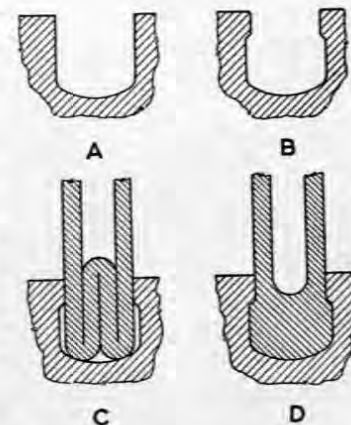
Connecting W-shaped sheet metal fins to a steel cylinder.
